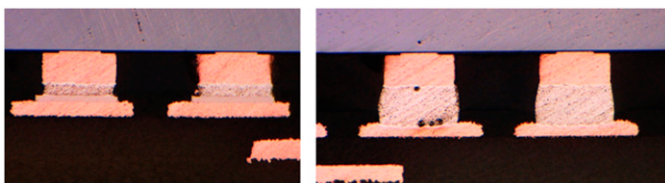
Cross sections of ENIG pads (left) compared with solder on pad (right).
